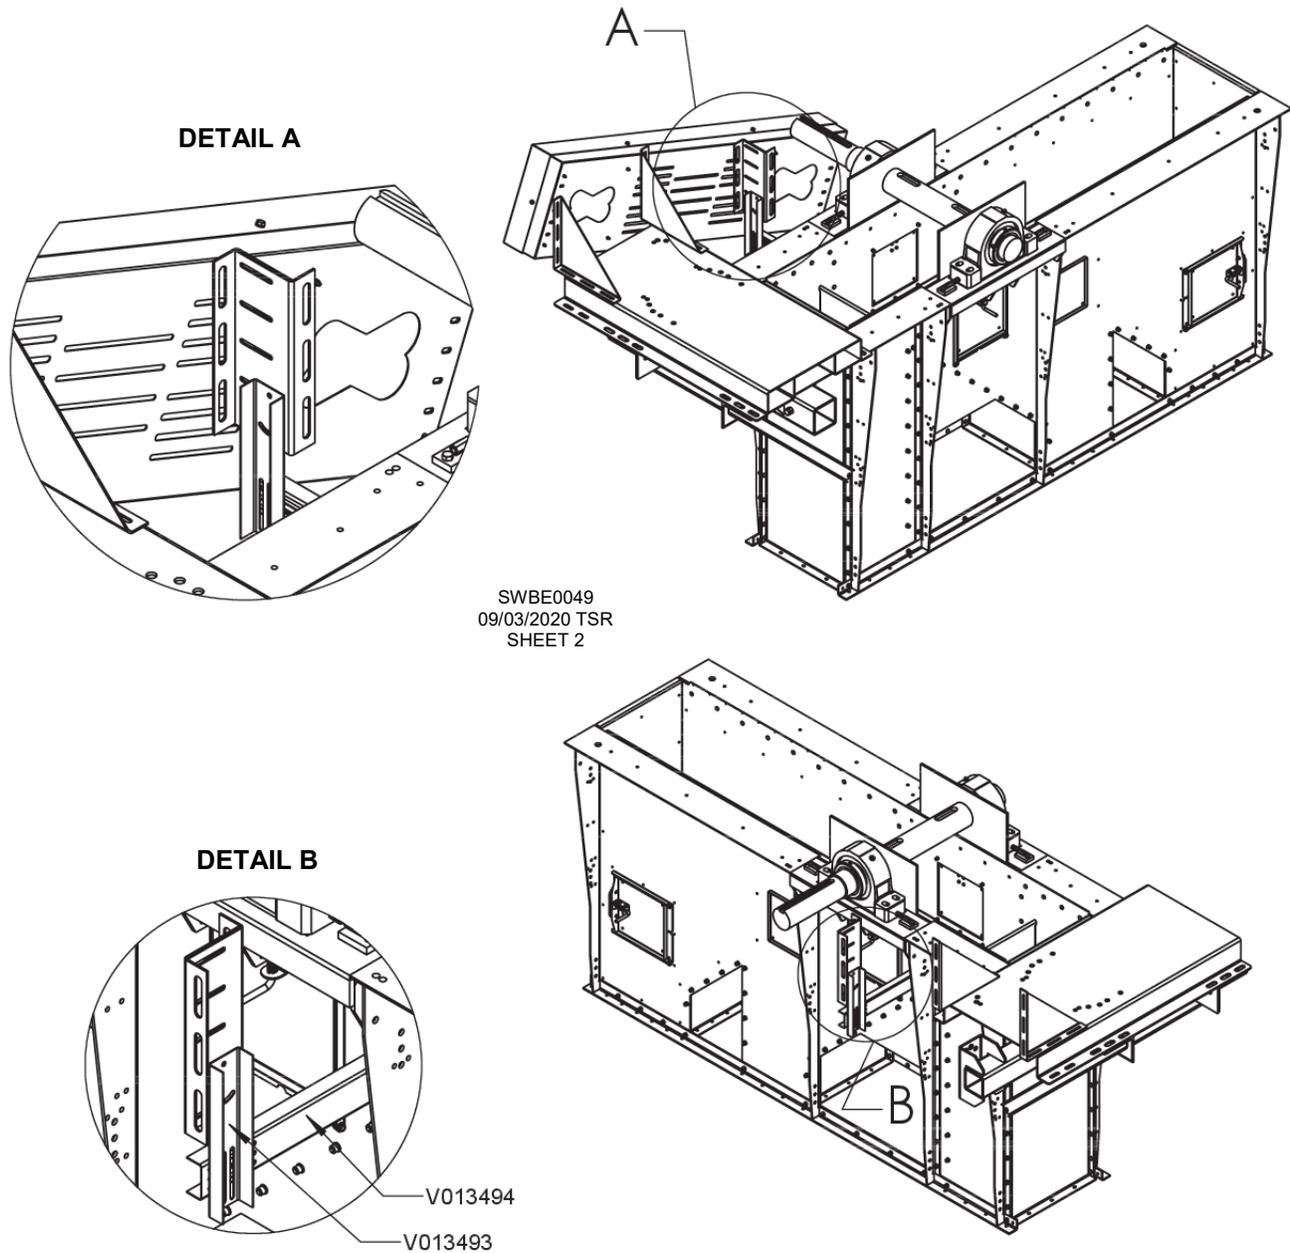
Belt shield shipping brackets removal for 42" or 48" pulley drive
